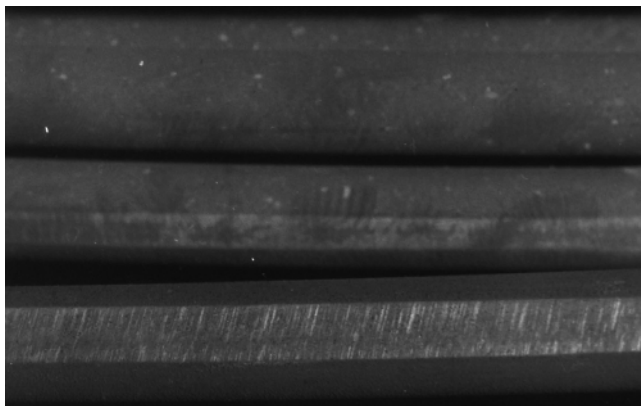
Tube-to-Tube Fretting Wear in the U-Bend Region of an Early Nuclear Steam Generator (Pettigrew, 1976).
